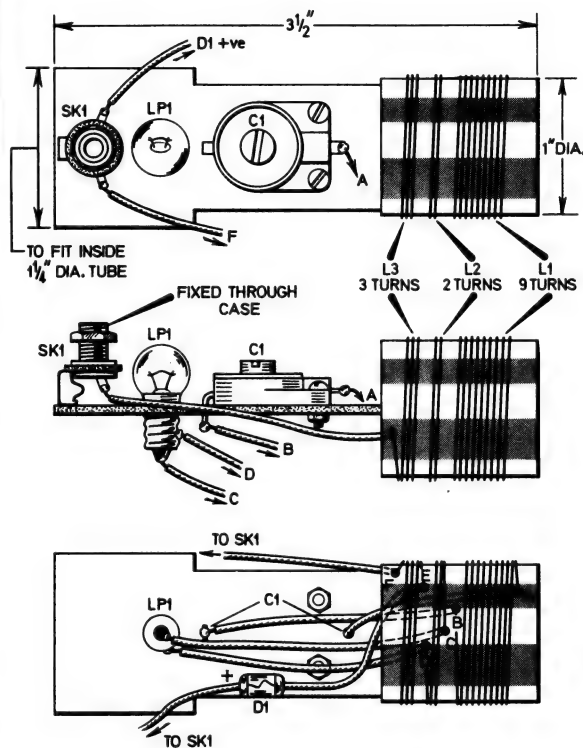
Constructional details showing the complete unit without the case. The three views show the top, side and underside of the unit. SK1 is mounted through the outer case.
